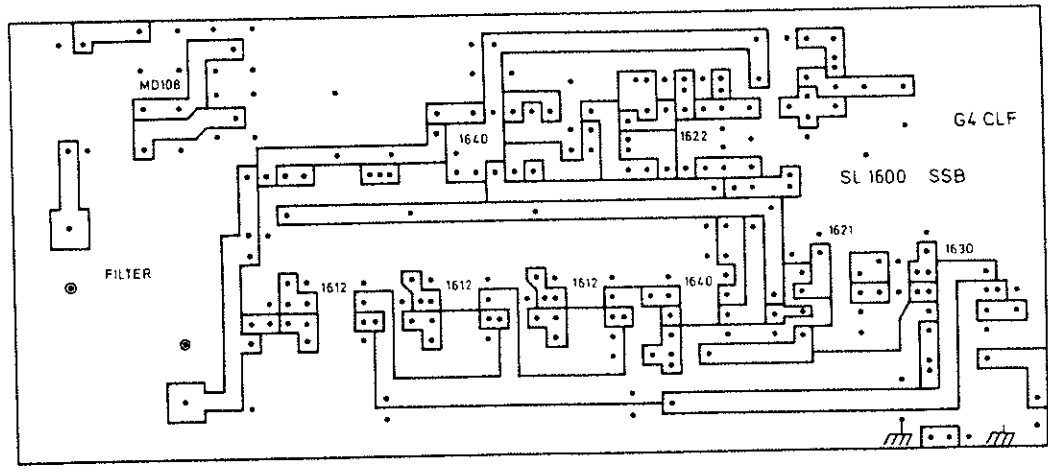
SL1600 SSB transceiver printed circuit layout. Scale 2:1
